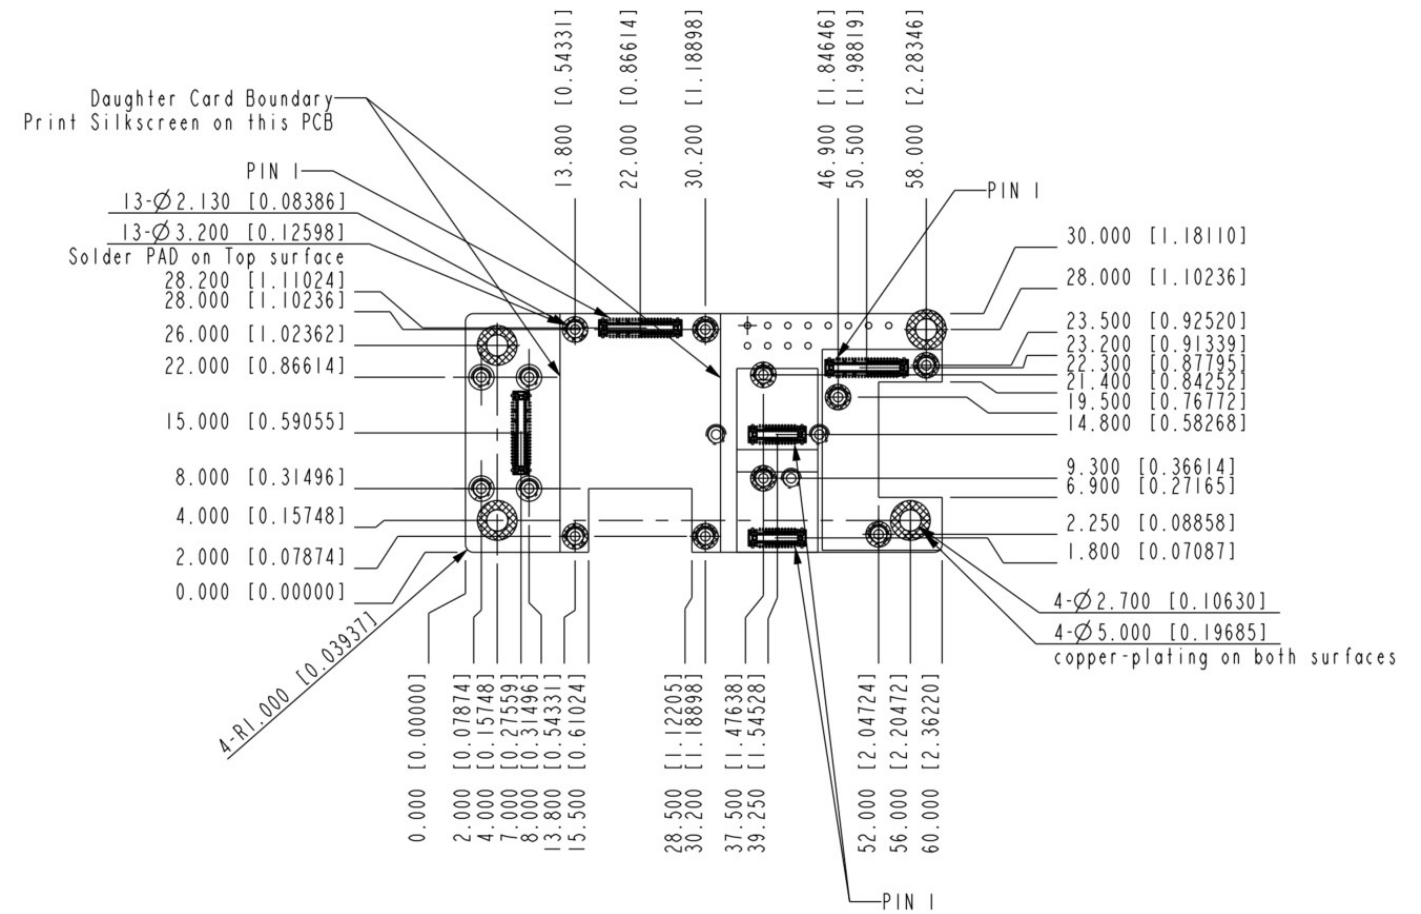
RAK19010 mechanical dimensions and mounting holes locations
